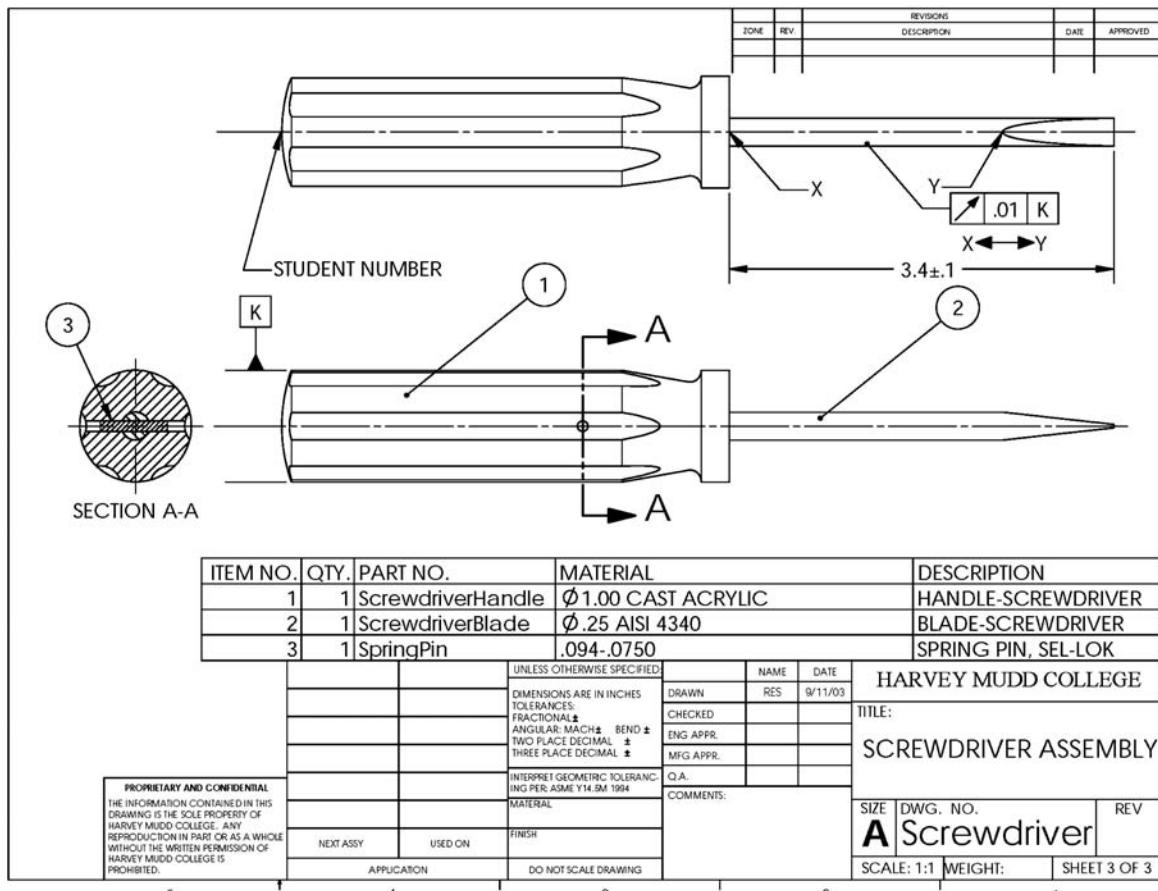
The bill of materials (BOM) for a screwdriver, listing all of the materials needed to fabricate the part. In this case, the BOM is built into a drawing, but it could be given as a separate list. (Drawing courtesy of R. Erik Spjut.)
